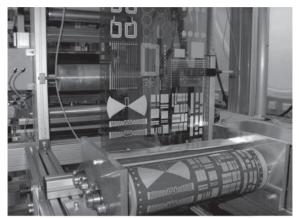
Roll to roll (R2R) printing machine producing printed electronics circuits.
